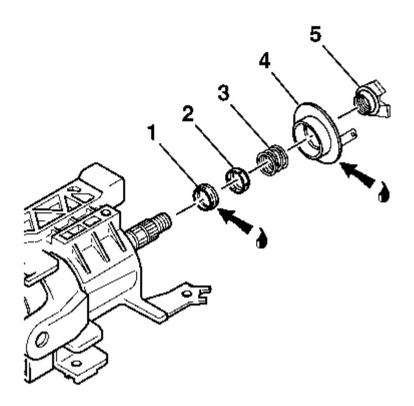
Installing Cam Orientation Plate, Turn Signal Cancel Cam, Upper Bearing Spring, Upper Bearing Inner Race Seat & Inner Race Courtesy of GENERAL MOTORS CORP.
